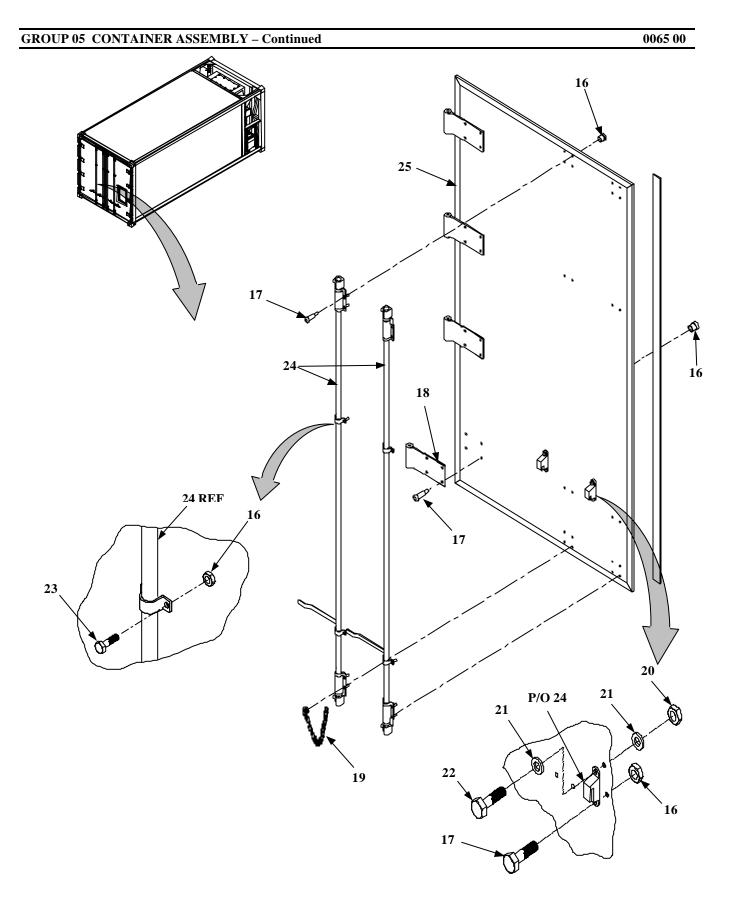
Left Hand Door Assembly (Sheet 3 of 3)
